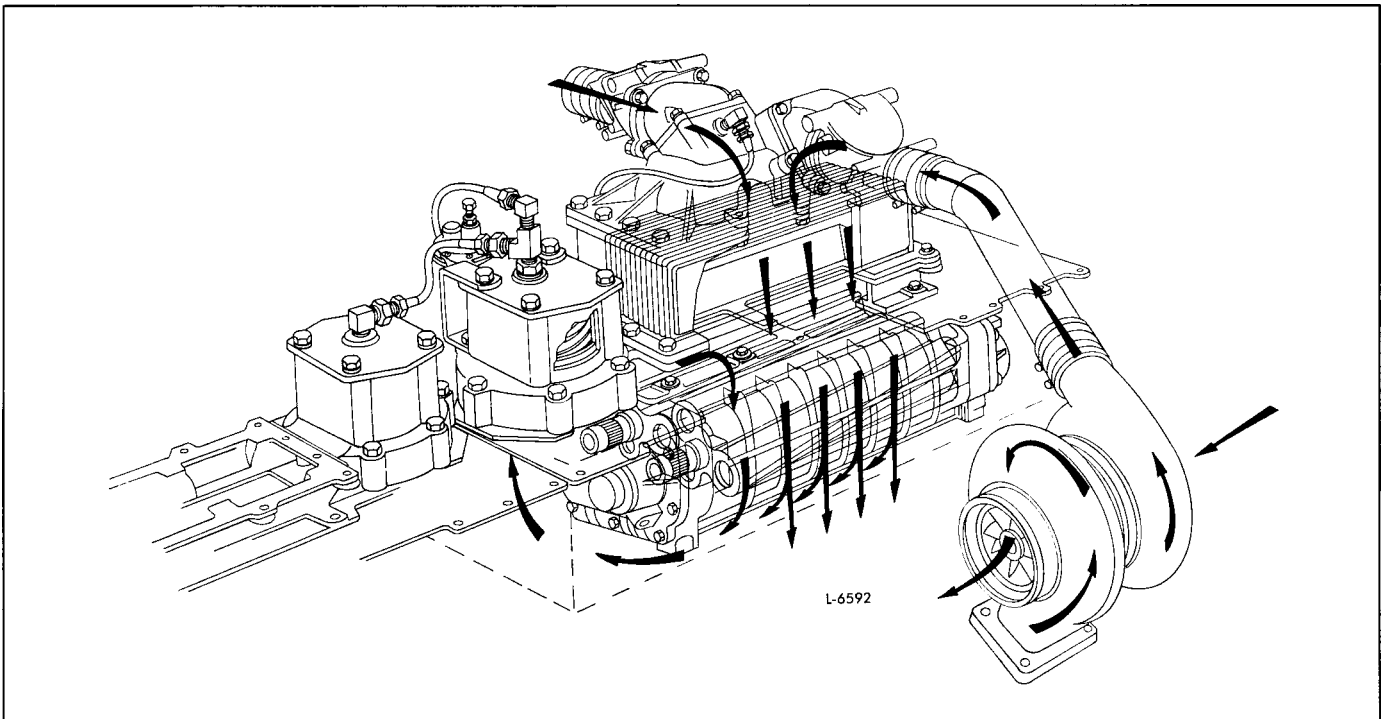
Air Flow Schematic – Series 149 Blower Bypass Valve Equipped Engine (Current Piston Style Valve System)
